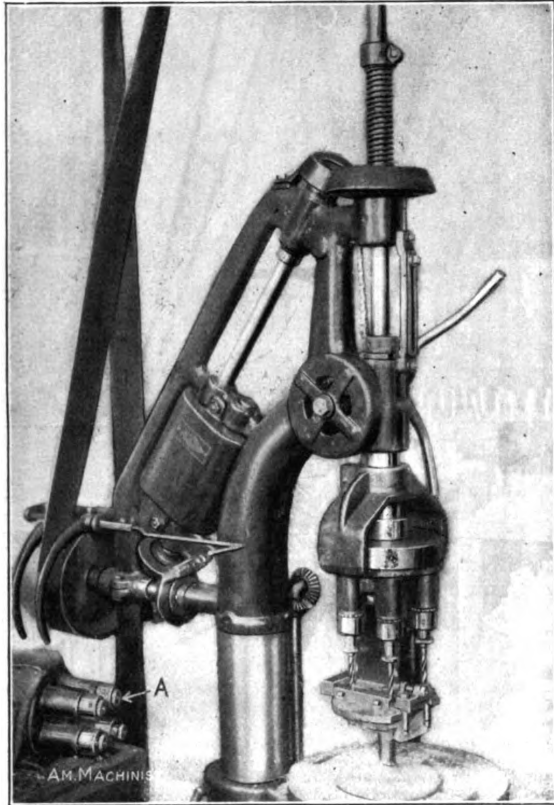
SPECIAL DRILLING MACHINE WITH MULTIPLE HEAD
